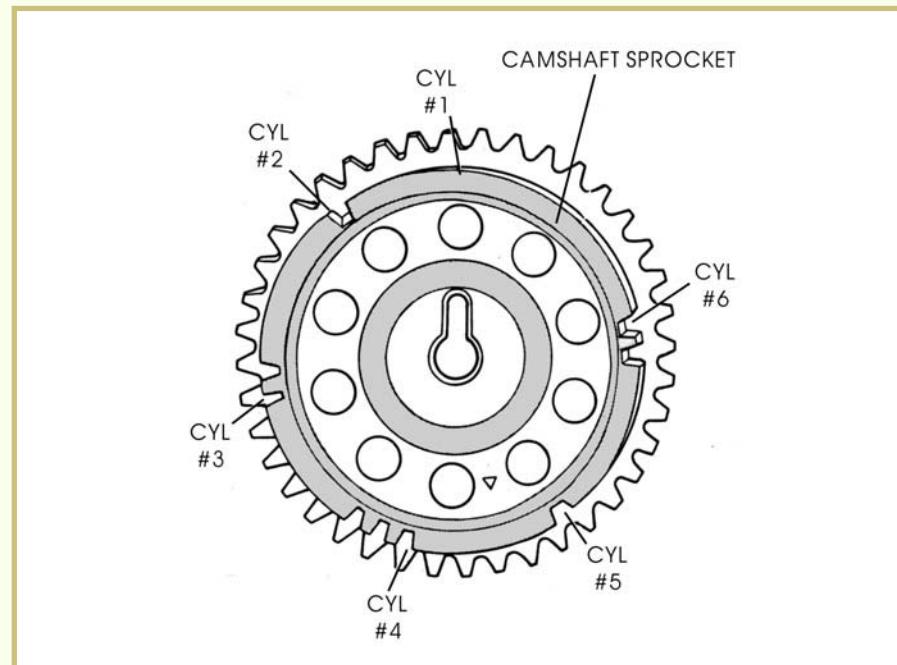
The camshaft gear that's used in this ignition system is shown here. (Courtesy of Chrysler Corporation)
